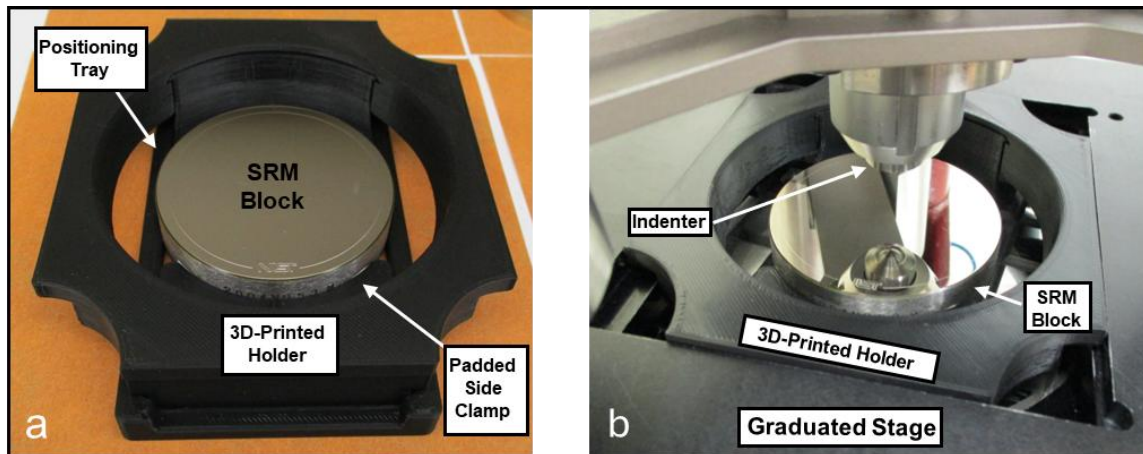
Sequential setup of the SRM block for testing. (a) The SRM block is secured in the custom 3D-printed holder with a block positioning tray and padded side clamps to prevent lateral movement. (b) The clamped block is inserted into the graduated stage, with the bottom surface in contact with the anvil prior to seating.
